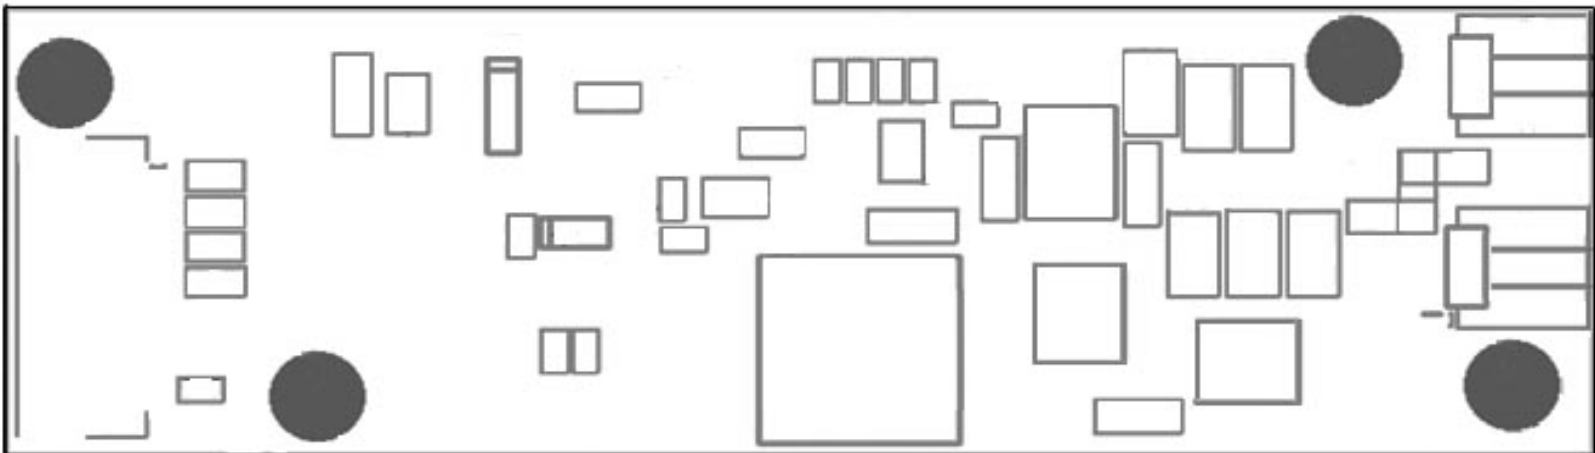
AIT-8000 Driver Board Assembly (A1A1A1)
